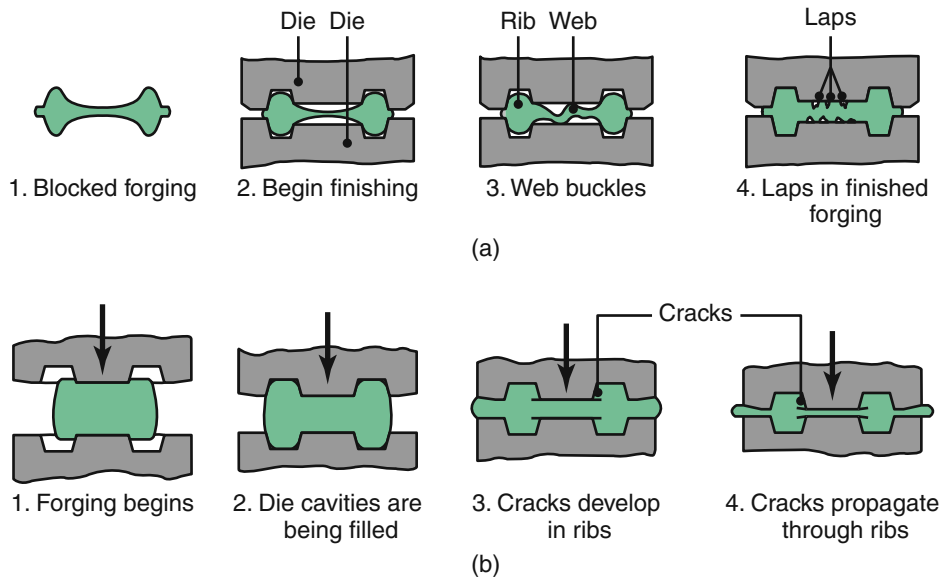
Examples of defects in forged parts. (a) Laps formed by web buckling during forging; web thickness should be increased to avoid this problem. (b) Internal defects caused by an oversized billet. Die cavities are filled prematurely, and the material at the center flows past the filled regions as the dies close.
